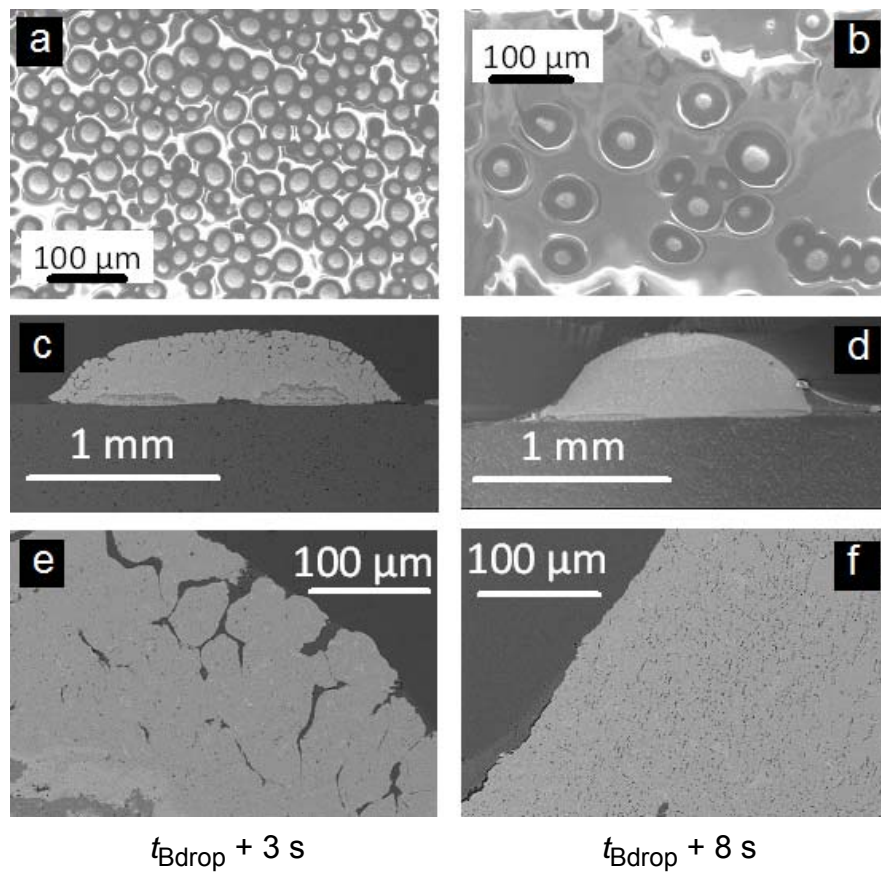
The (a, b) top view and (c, d, e, f) cross sectional view of solder B samples interrupted at (a, c, e) 3 s and (b, d, f) 8 s after resistance drops after THER.
